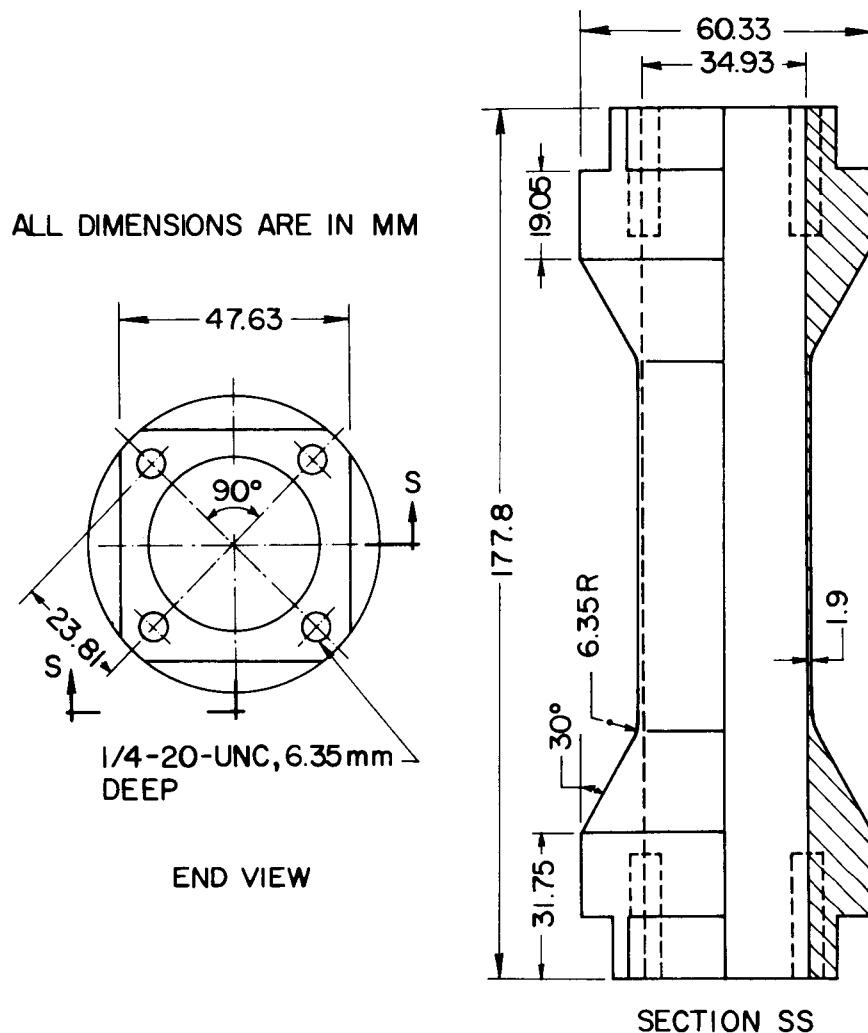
Test specimen details (1 in. = 25.4 mm).
